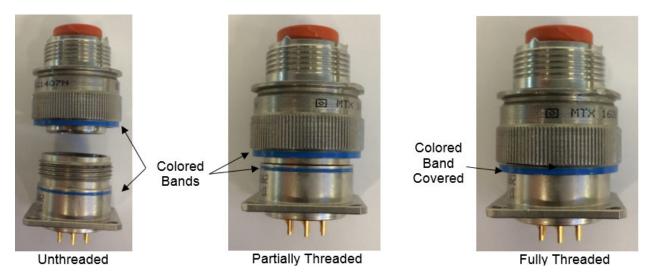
Mating Cable Harness to Gas Staging Valve
